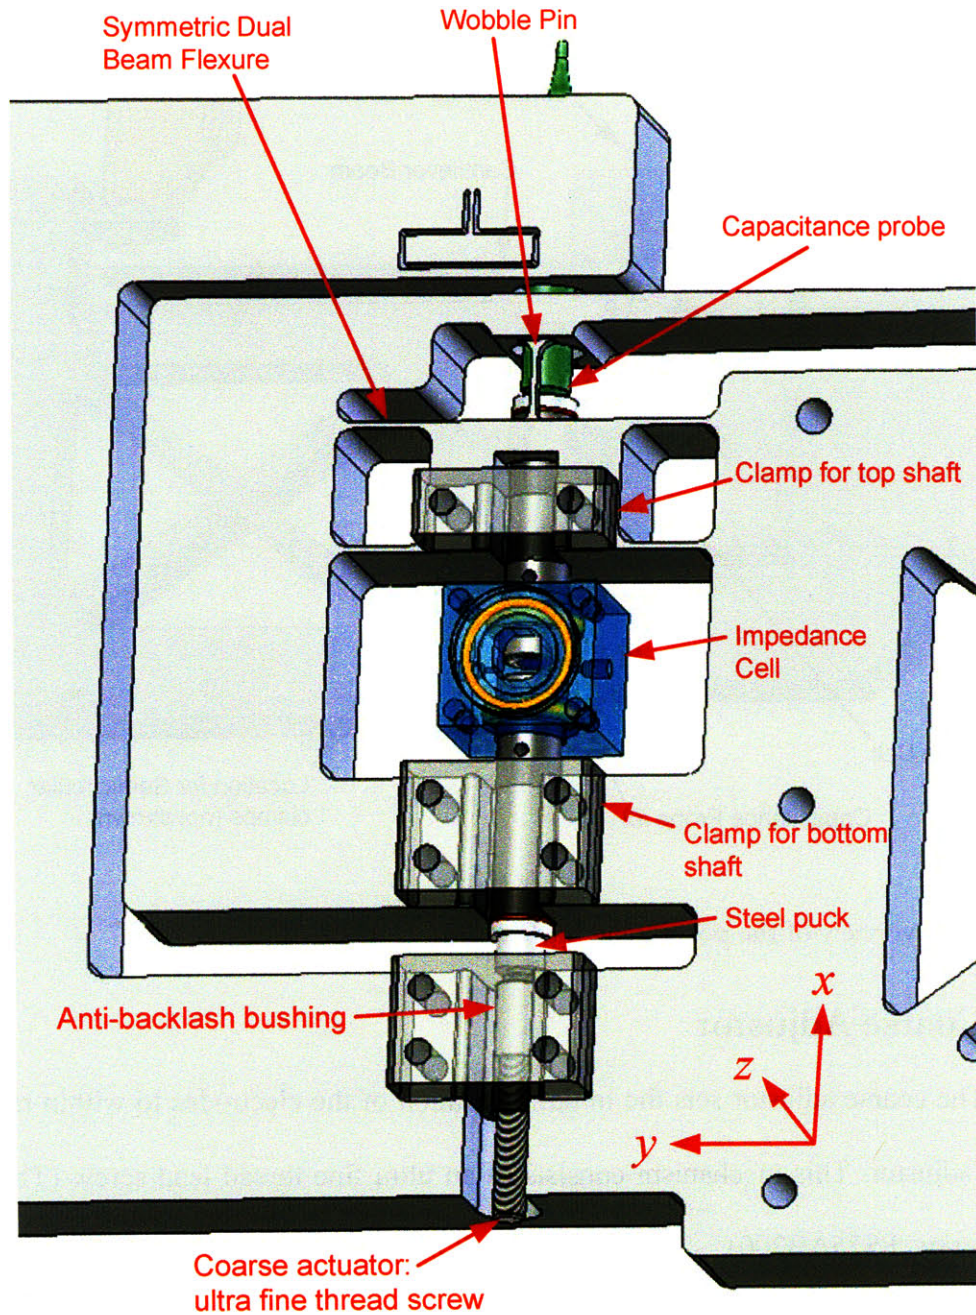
Detail of the flexure mechanism design including coarse actuator, capacitance probe, and clamps for constraining the electrode mounting shaft.
